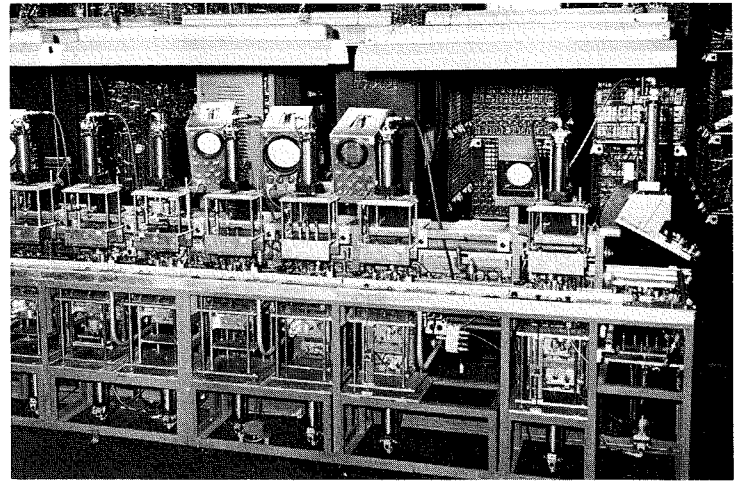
Testing mechanism in use on printed circuit boards. Assemblies are automatically passed through inspection, testing, and alignment positions.
